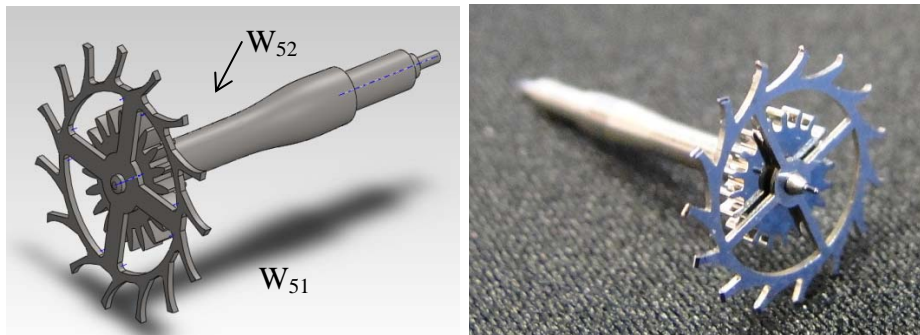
Escape wheel, W_{51} , and wheel, W_{52} - (a) SolidWorks image, (b) actual component
